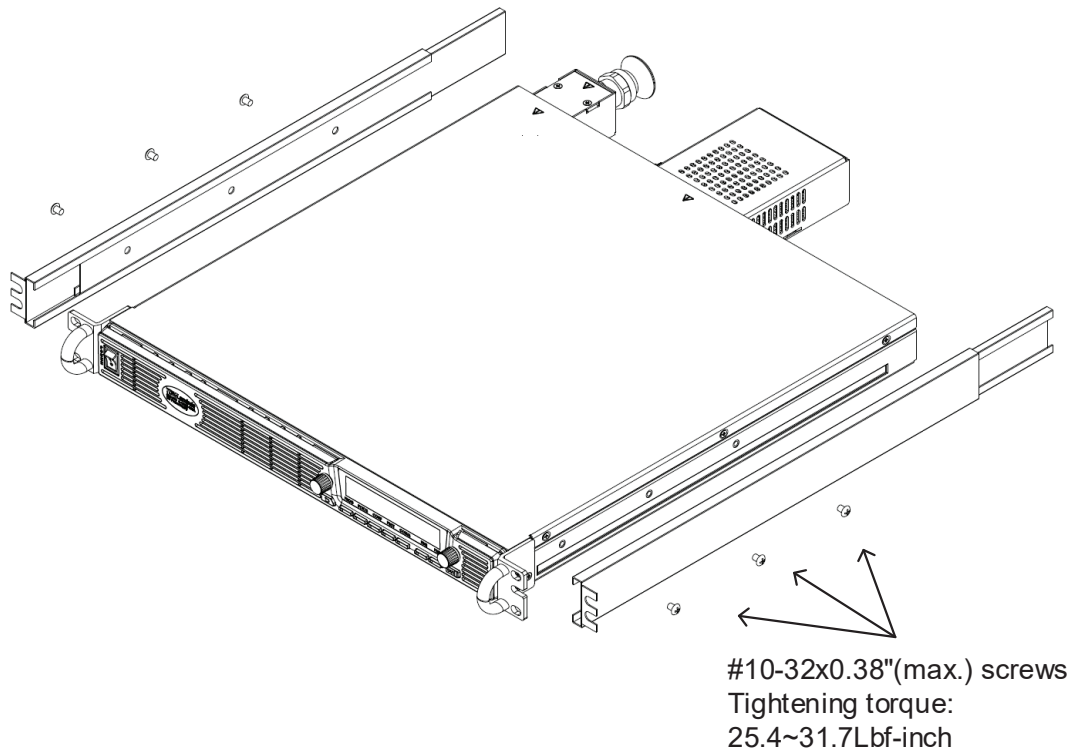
1 – 1kW Up to 5kW Rack – Mount Slides Assembly
